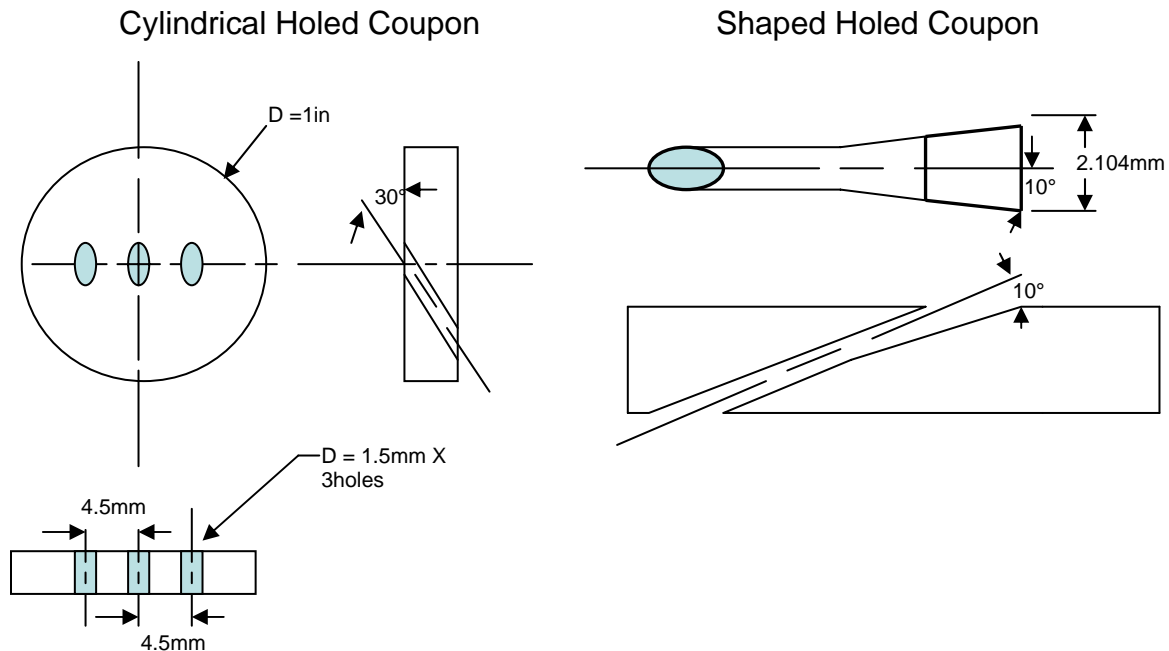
Relative dimensions of cylindrical and shaped hole coupons to be used for film cooling tests.
